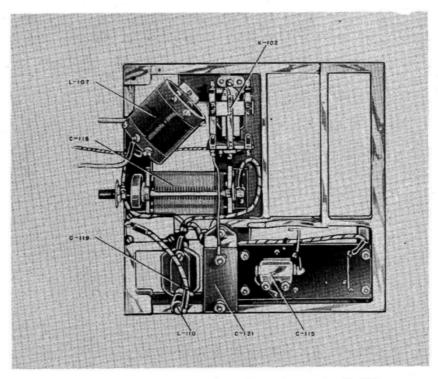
Transmitter Left-End Casting — Inside View (older model shown; see note for Fig. 1)
